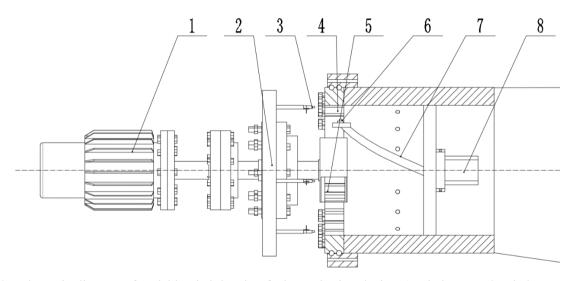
Schematic diagram of variable pitch bearing fault monitoring device: 1- Pitch motor 2- Pitch motor support frame, 3- Fiber optic displacement sensor, 4- Pitch bearing, 5- Pitch motor gear, 6- Eddy current sensor, 7- Fixed frame, 8- Fixed frame motor
